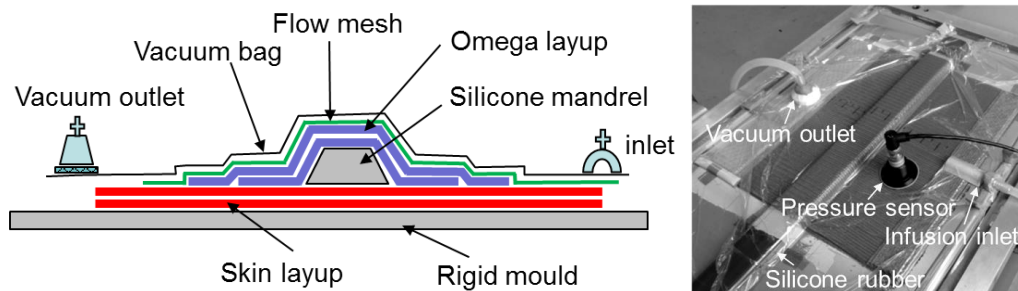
Sketch (Left) and actual setup (Right) of vacuum assisted resin transfer moulding for manufacturing the nacelle sub-component.
